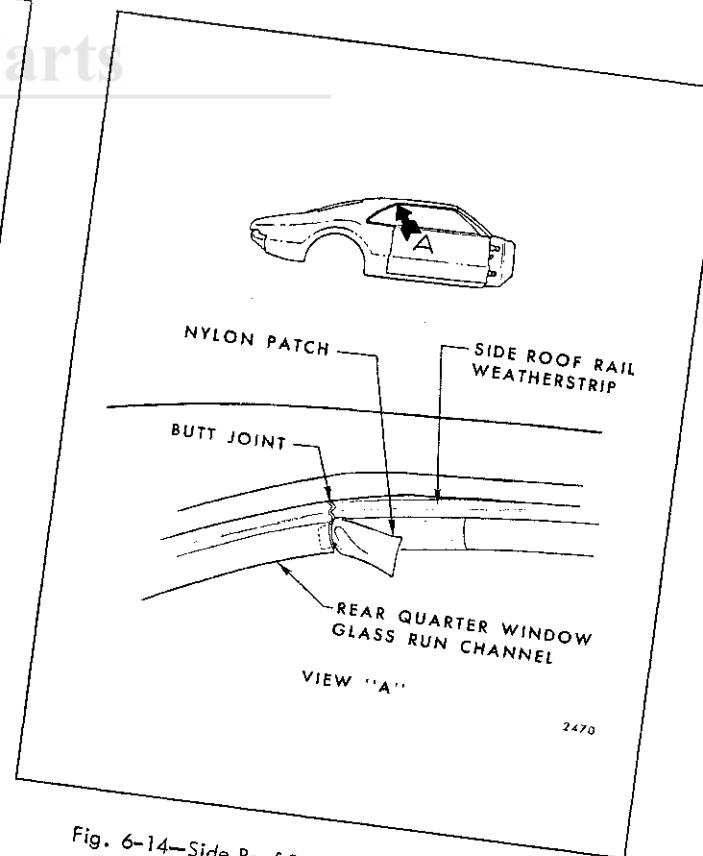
Side Roof Rail Weatherstrip Repair -
